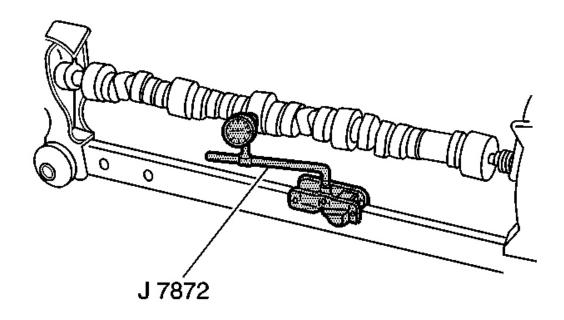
Measuring For Bent Engine Camshaft Or Excessive Engine Camshaft
